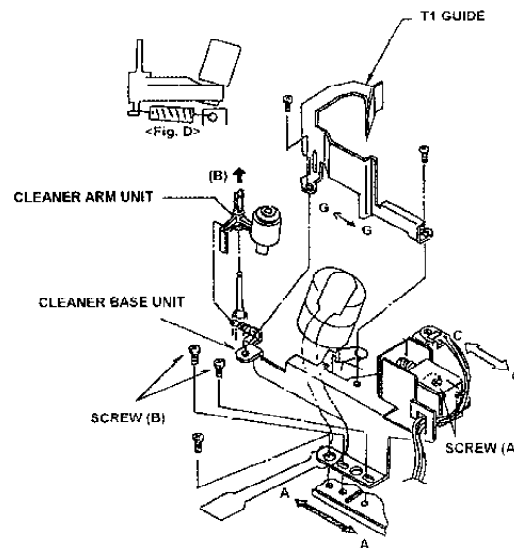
Cleaner Solenoid Position Adjustment (1)
